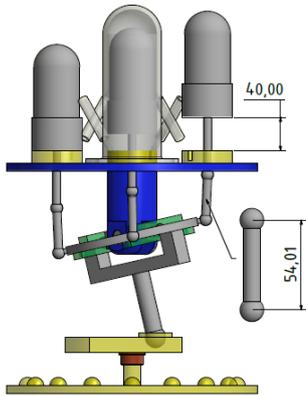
Model of wobble yoke mechanism- stroke and length of ball joint segment
